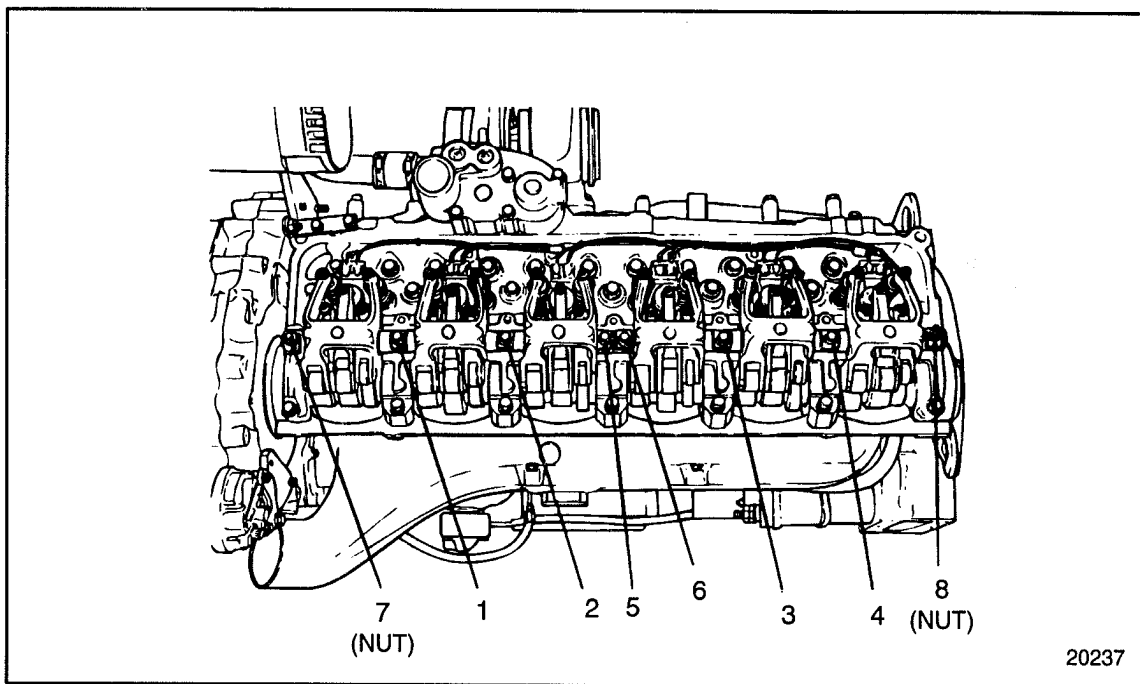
Rocker Arm Shaft Bolt and Nut Torque Sequence
